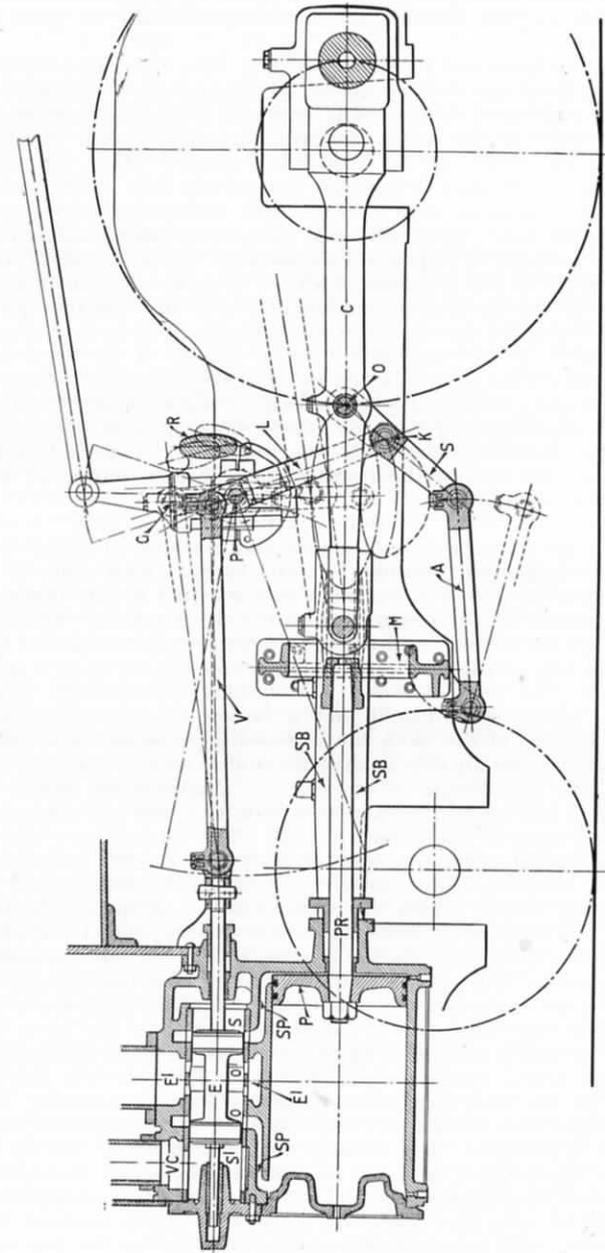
LAYOUT OF JOY'S RADIAL VALVE MOTION FOR LOCOMOTIVES.
